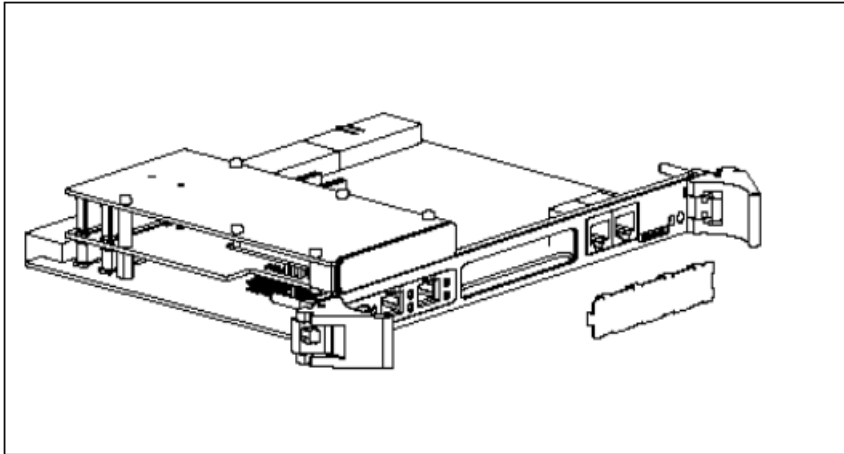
Final Assembly OF PMC 280 ON PMC 270 TRANSPOSER CARD ,Assembly process – 3
